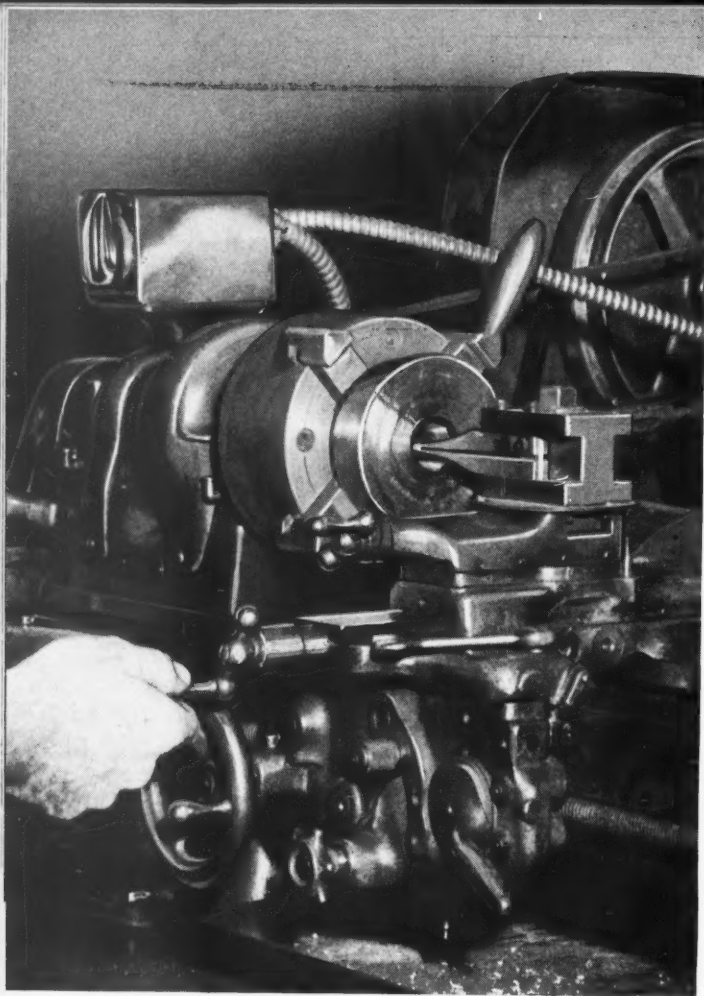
A diamond tool taking a 0.001-inch cut in reboring a carbide die. The worn 0.810-inch bore is enlarged to 0.873 inch diameter, within a tolerance of plus 0.000, minus 0.001 inch
